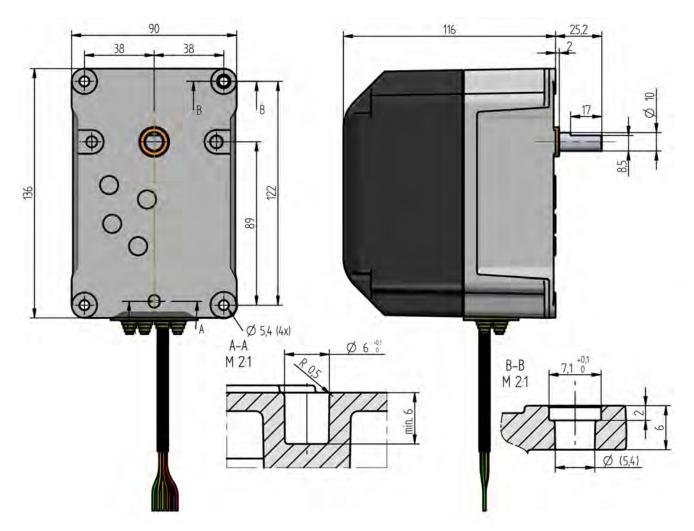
Dimensional drawing of actuator type 662R5001-1 and type 662R5003-1 with cable
